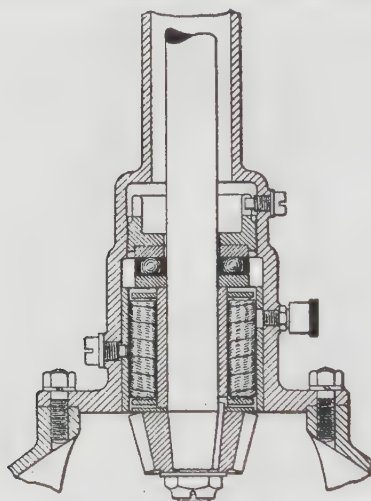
PINION SHAFT MOUNTED IN HYATT ROLLER BEARINGS.
